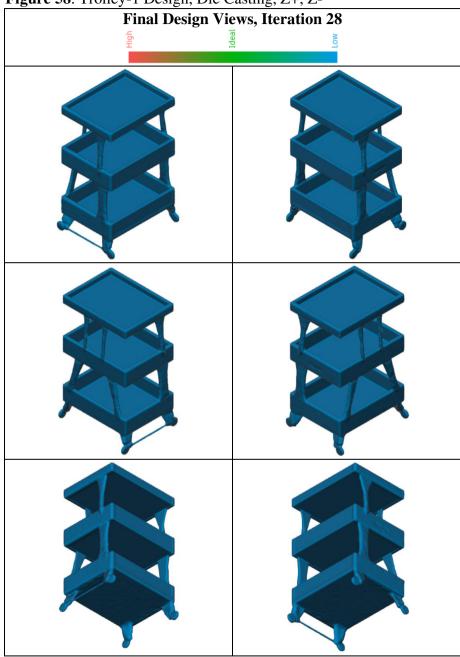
Trolley-1 Design, Die Casting, Z+, Z-
